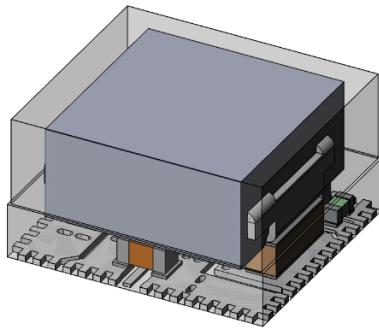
CAD Drawing of Plastic Molded 3D Power Module
